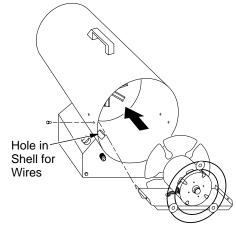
Replacing Motor, Motor Mount, and Fan Guard into Heater
